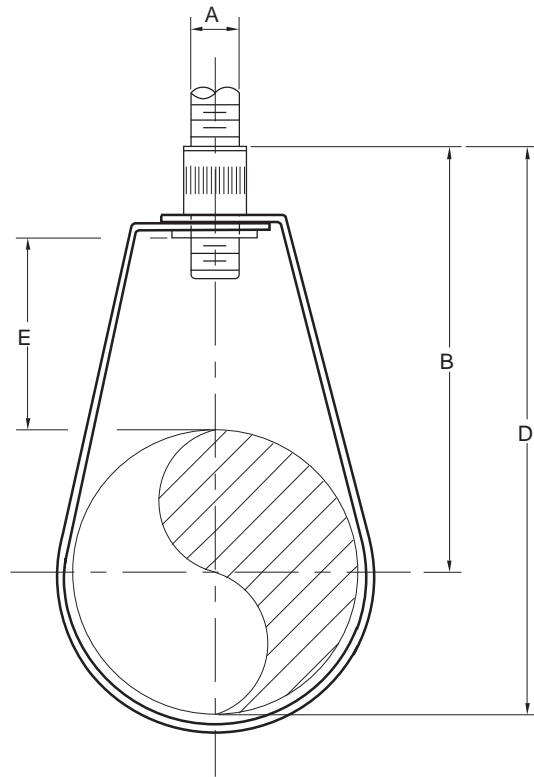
CT - ADJUSTABLE SWIVEL RING
